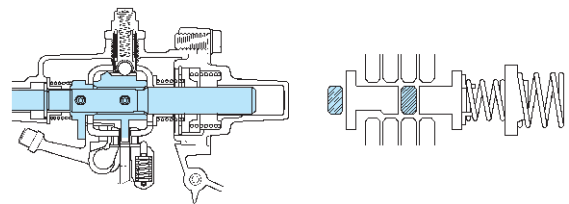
In this transaxle, selection and shifting motions enter the shift shaft (blue) and are transferred to the shift forks. (Courtesy of Toyota Motor Sales USA, Inc.)
